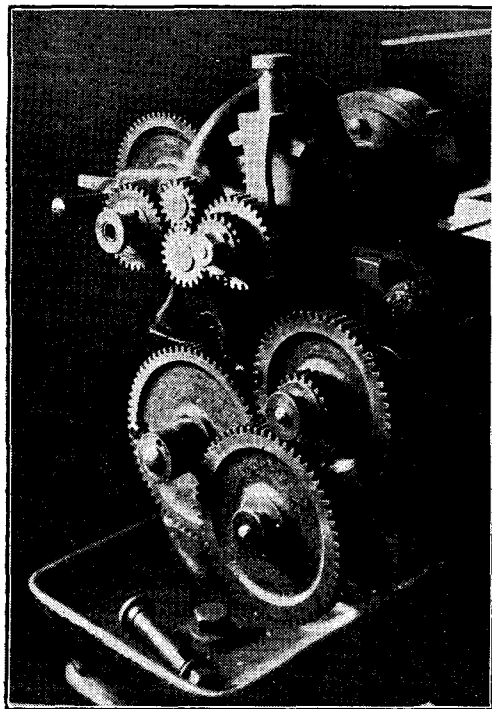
The Cluster Gear Mounted on the Reverse Arm of a 3½-in. Lathe.
